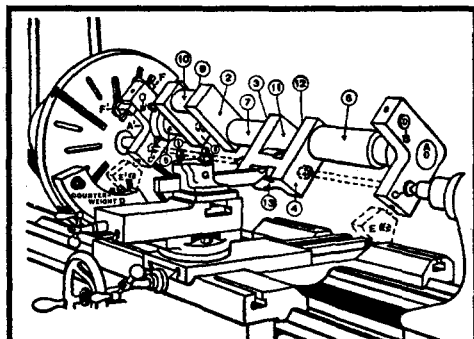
TURNING A TWO-THROW 90° ENGINE CRANKSHAFT. SCHEDULE DRAWING.
